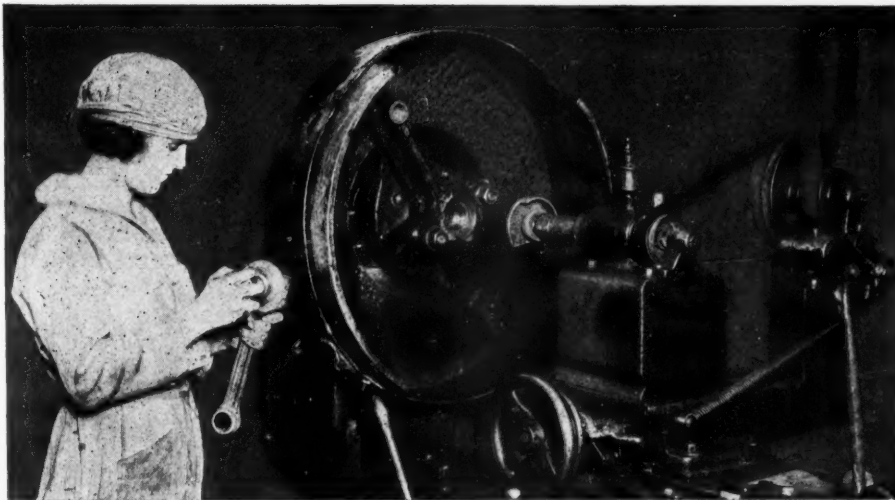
Rough grinding hole in big end on Heald internal grinder
